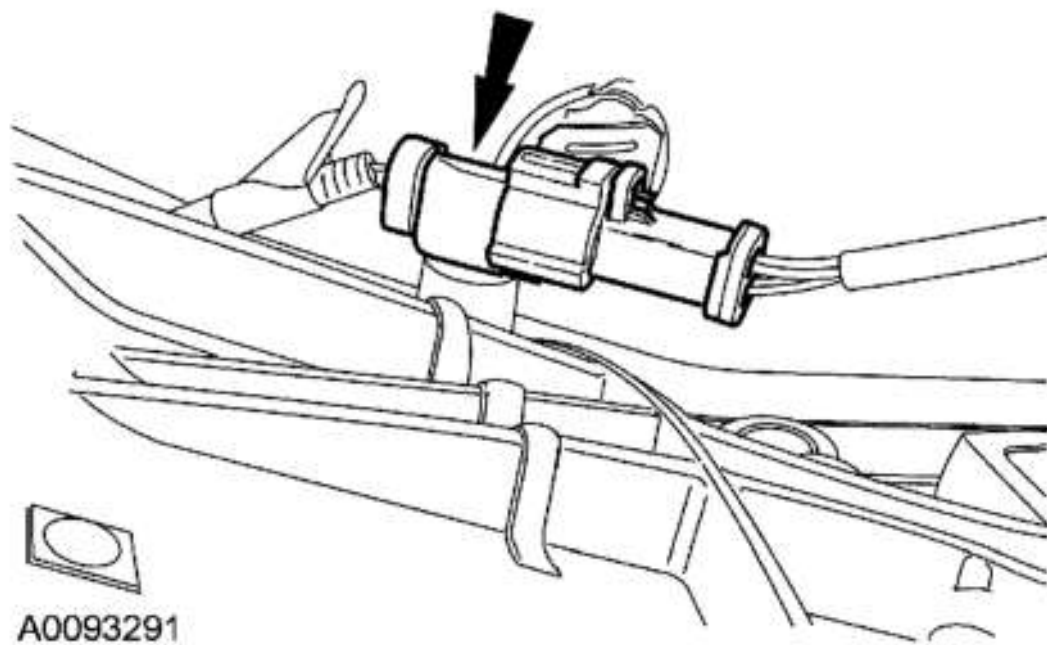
Disconnecting LH Heated Oxygen Sensor (HO2S) Electrical Connector
